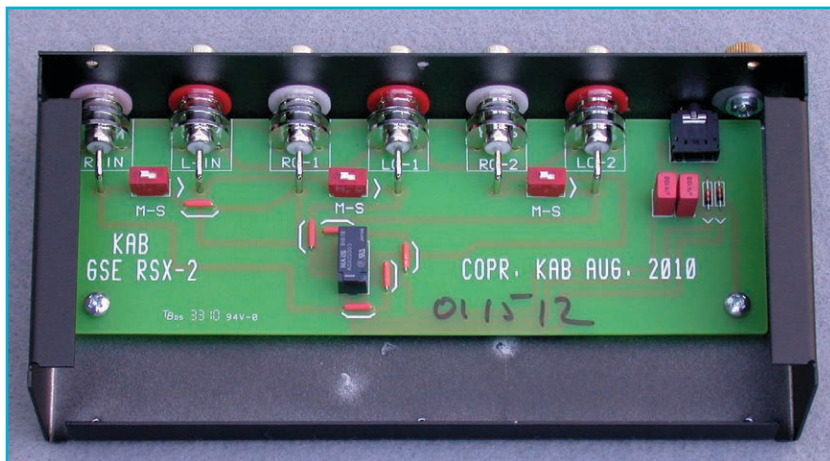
An internal view of KAB Electro Acoustics's RSX-1 reveals Cardas RCA jacks and a low-capacitance PC layout to ensure signal integrity. The steel enclosure provides complete shielding and the switching relay minimizes drain on the remote control's battery.
